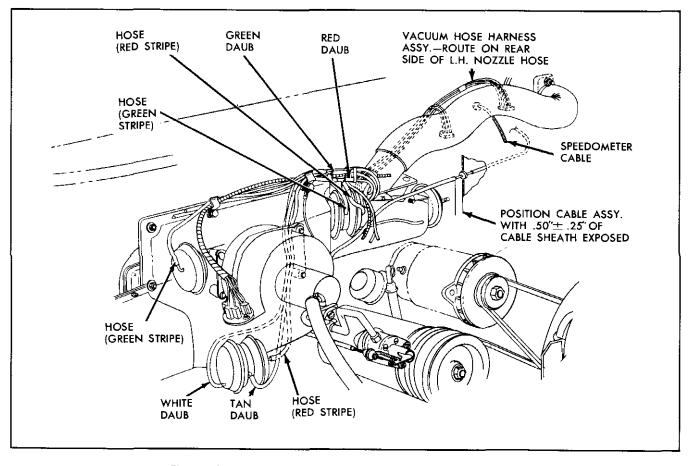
Vacuum Hose Connections at Control Diaphragms
